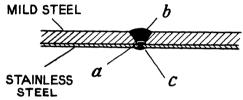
Method of welding stainless steel-clad plates.
